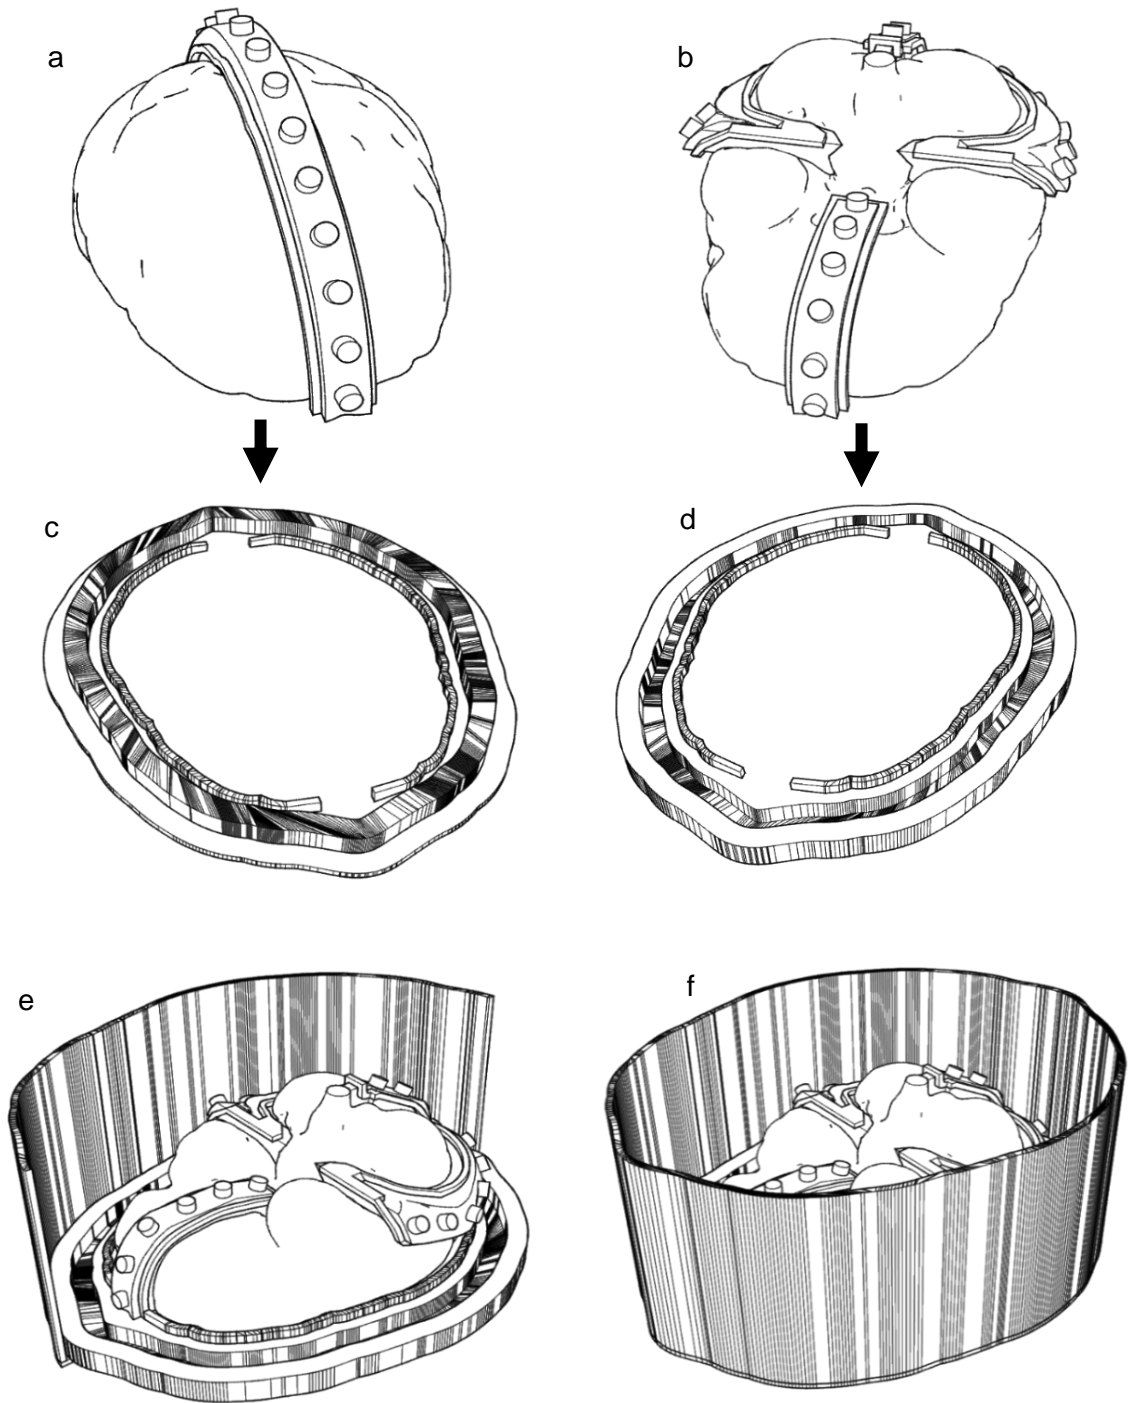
Addition of the mould bases and walls. a) top mould positive; b) bottom mould positive; c) top mould base; d) bottom mould base; e) bottom mould assembled with one wall; f) bottom mould assembled with both walls. Mould walls are not connected to the base.
